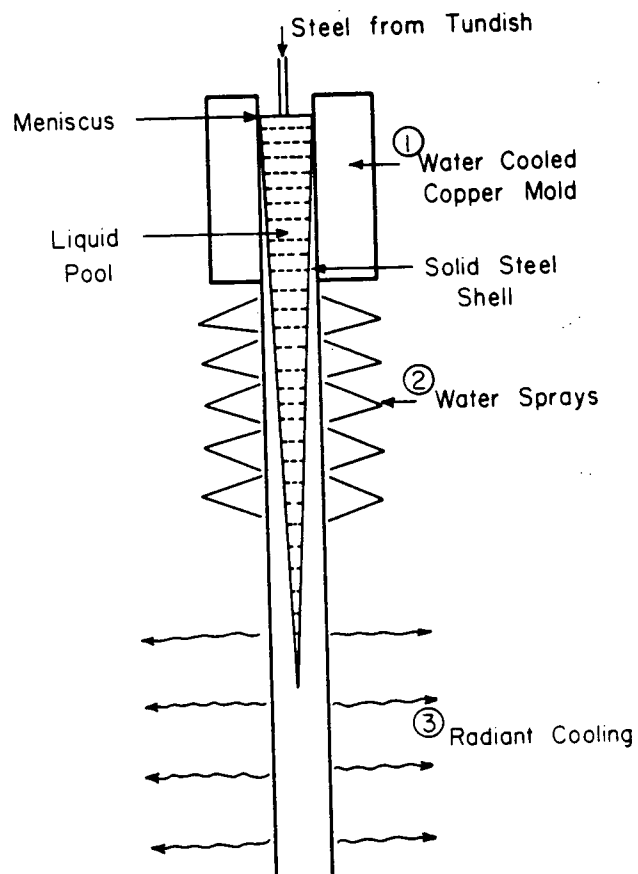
Schematic drawing of the continuous casting machine showing the different zones of heat extraction.
